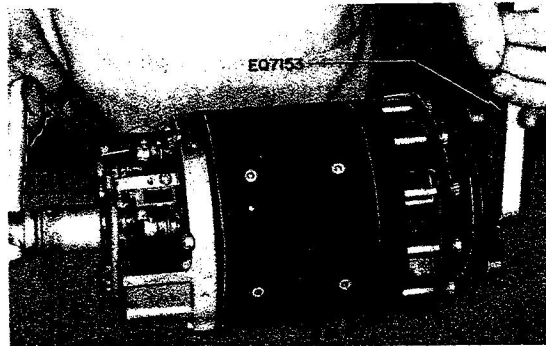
Removal of Nut From Commutator End of Armature Shaft
